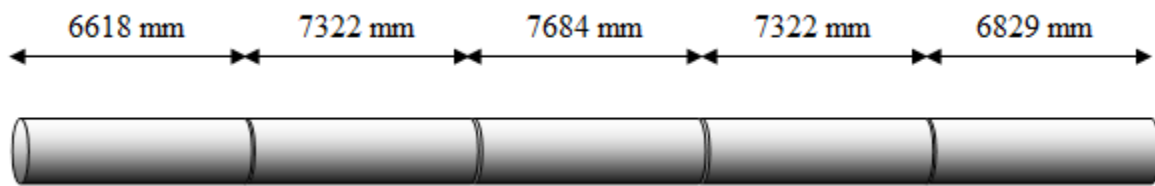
Schematic assembly of pipe segments for specimen of Test No. 10.
